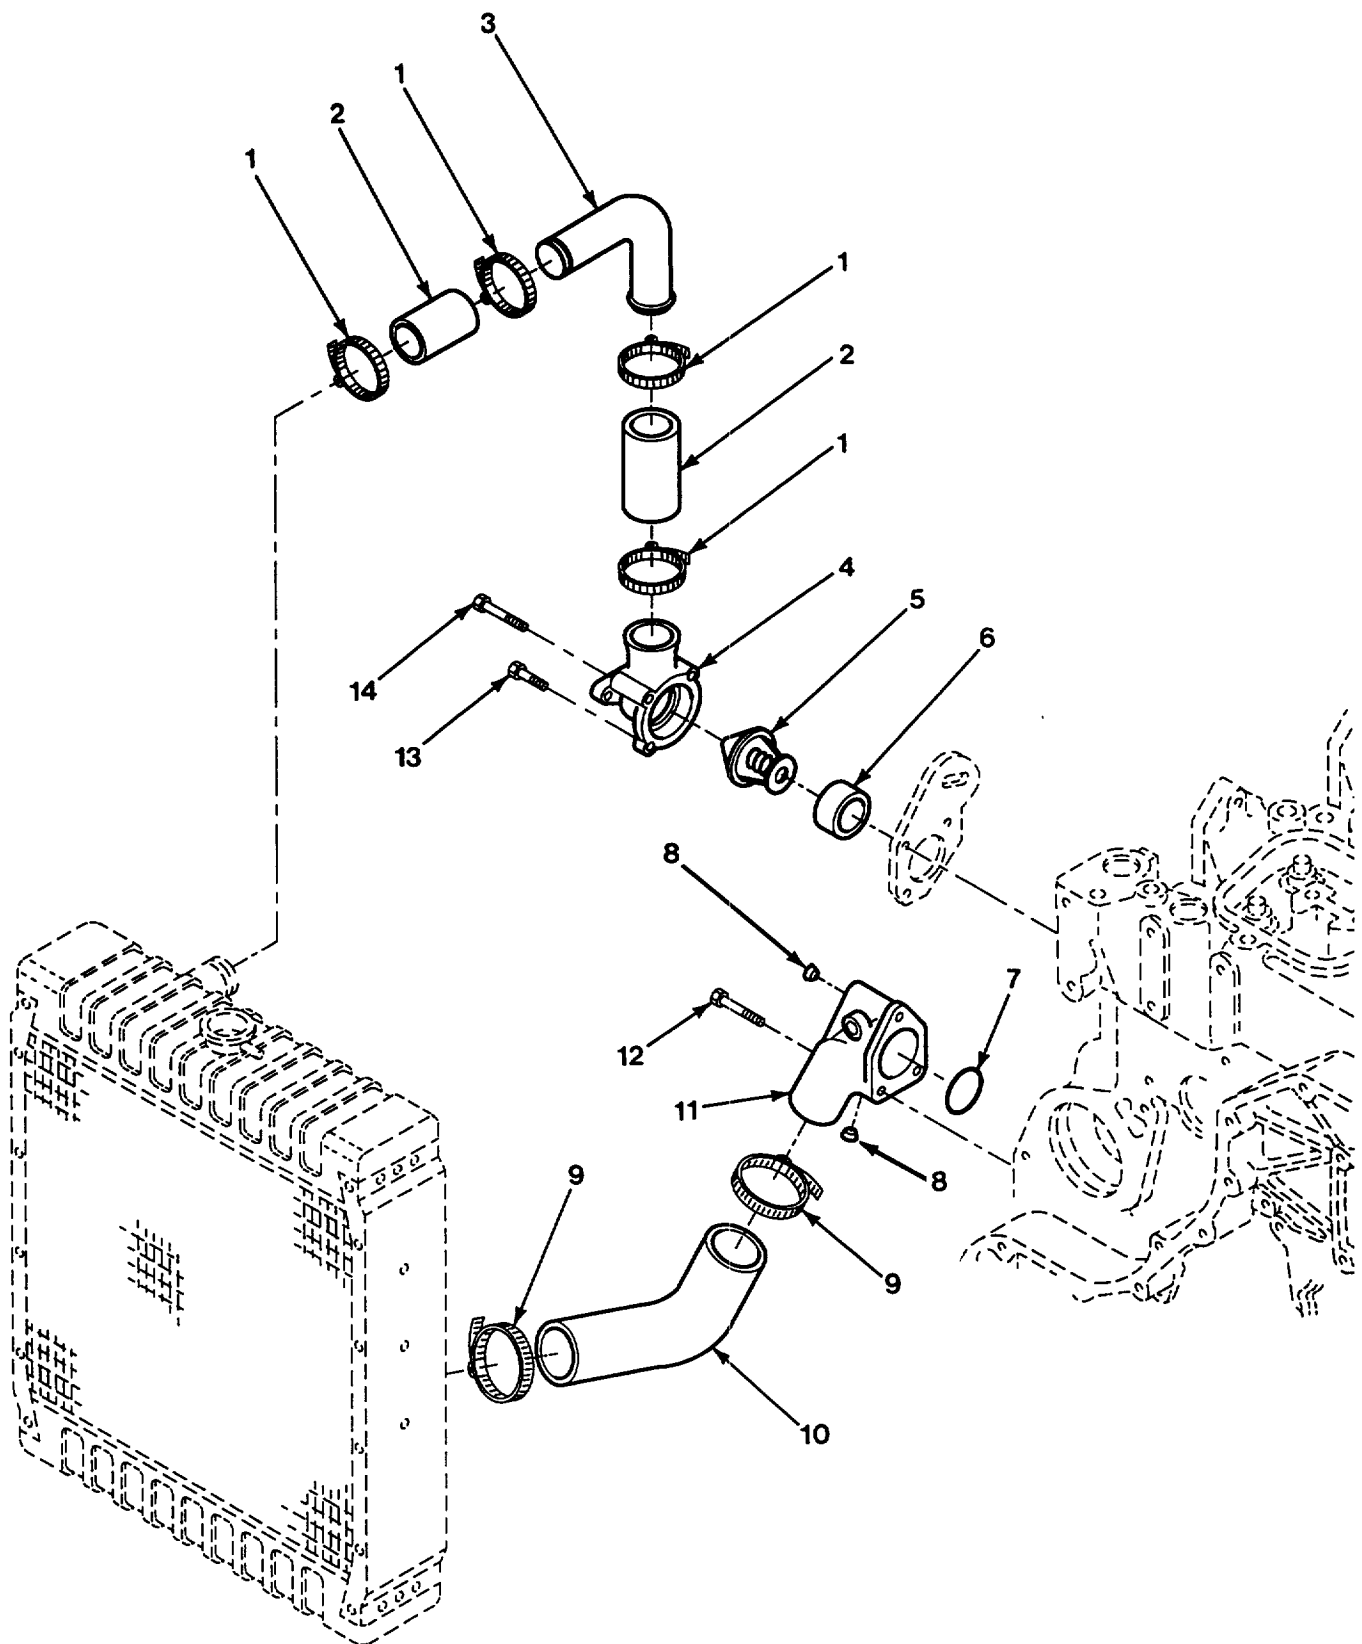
THERMOSTAT HOUSING, HOSES AND FITTINGS
